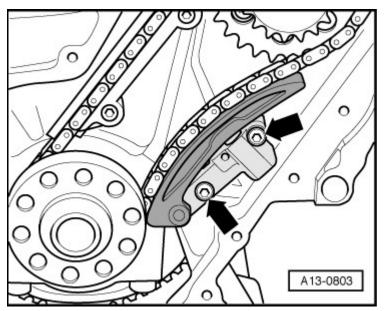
Chain Sprocket Bolt Courtesy of AUDI OF AMERICA, LLC
